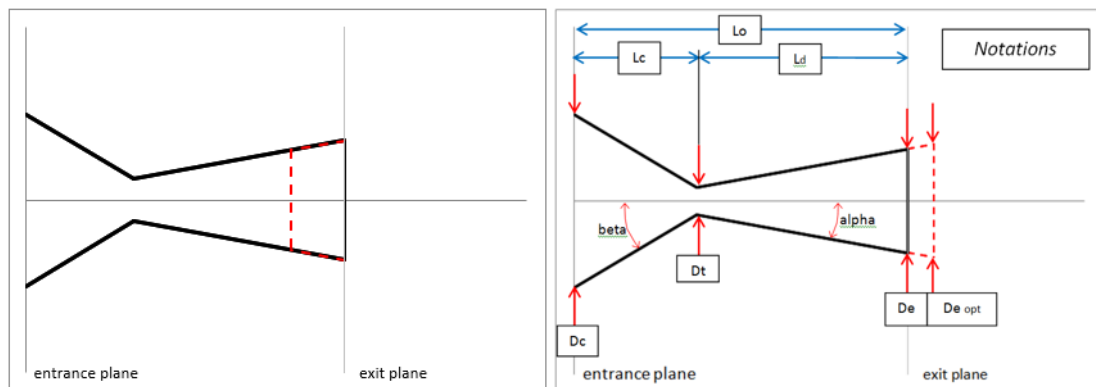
Designed nozzle and its dimensions of KNSB rocket fabricated in this study.
